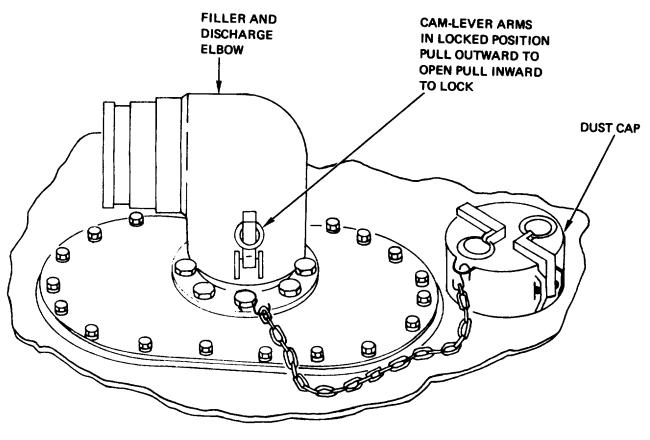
Filler and Discharge Elbow, All Tanks.
